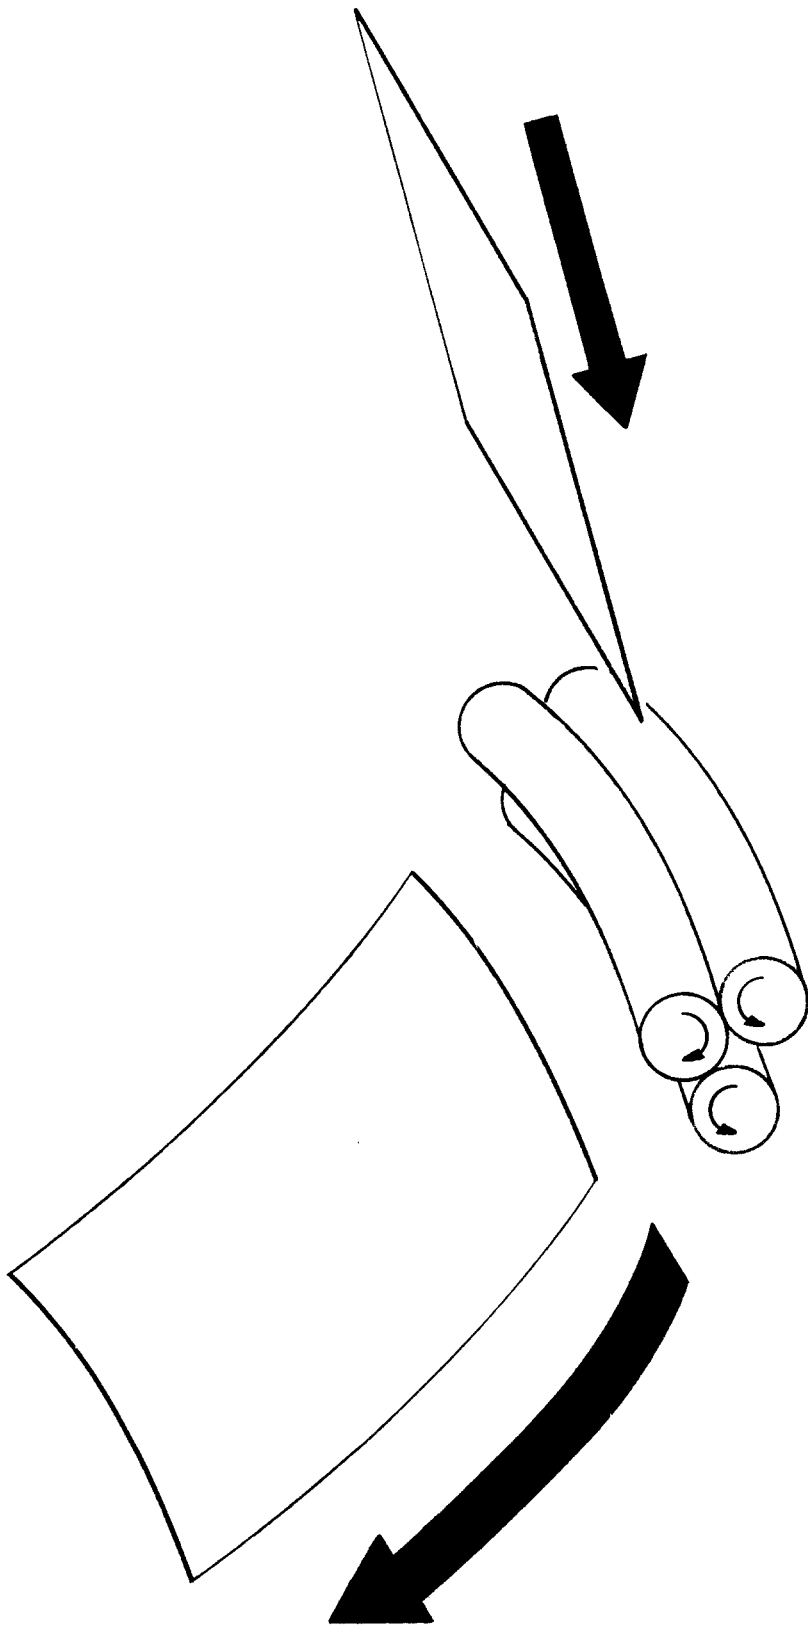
THREE DIMENSIONAL ROLL FORMER
